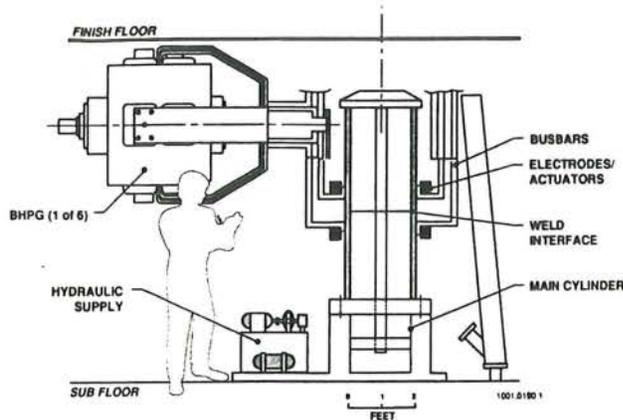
Proposed 0.56 m pipe welding system powered by the BHPG power supply
